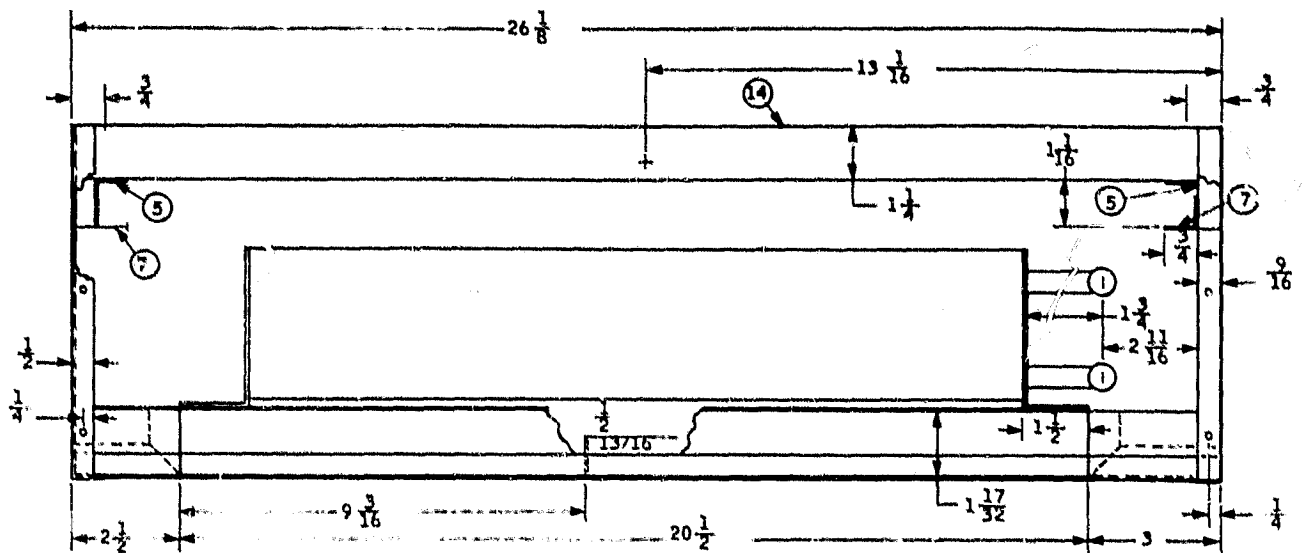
Cabinet Assembly Drawings of the Solar Assembly for the Residential Units
